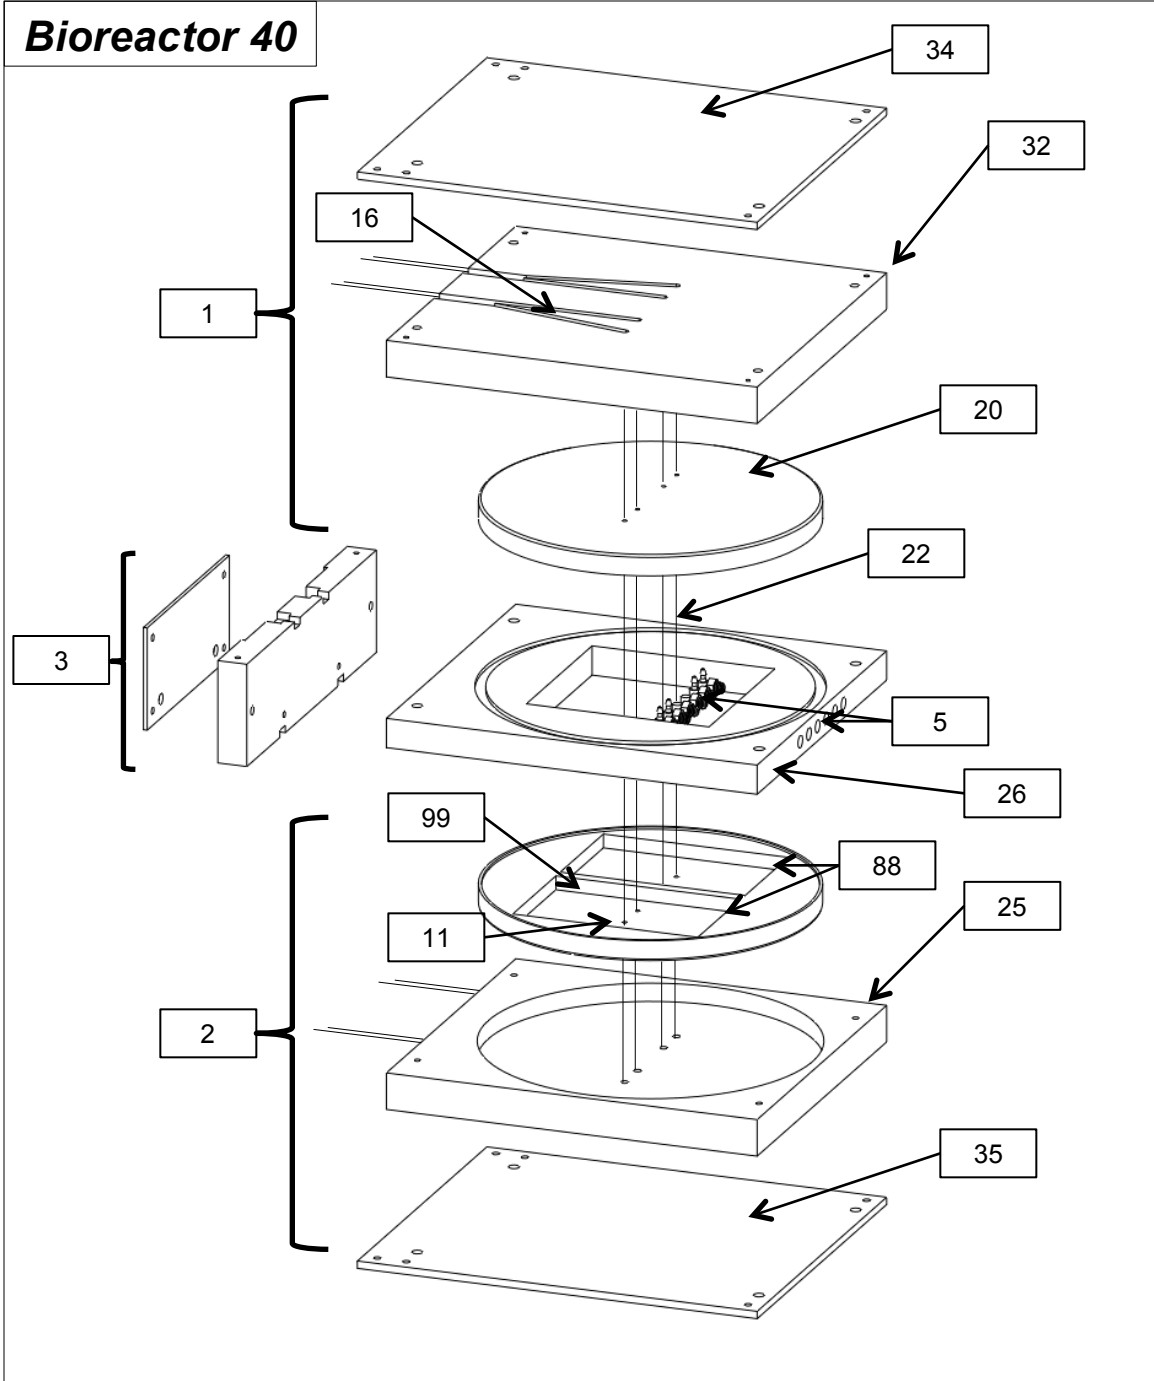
Exploded view of the Flip-Plate bioreactor design
